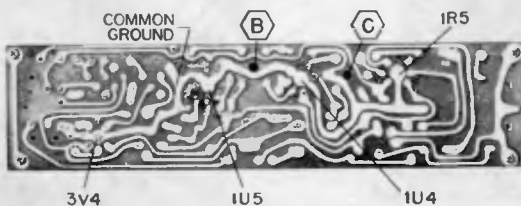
Bottom View of Chassis 200. Tube Locations and Alignment Points Shown.
